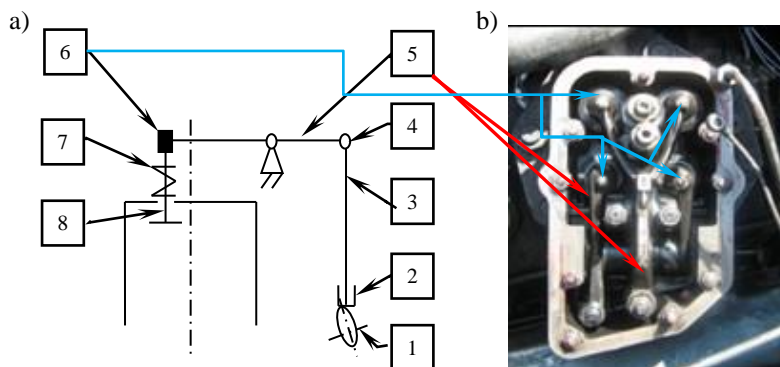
a) diagram of the timing system used in the engine; 1 – camshaft, 2 – tappet, 3 – push rod, 4 – screw valve lash adjustment mechanism, 5 – rocker arm, 6 – automatic valve backlash compensator, 7 – valve spring, 8 – valve; b) engine head timing system
